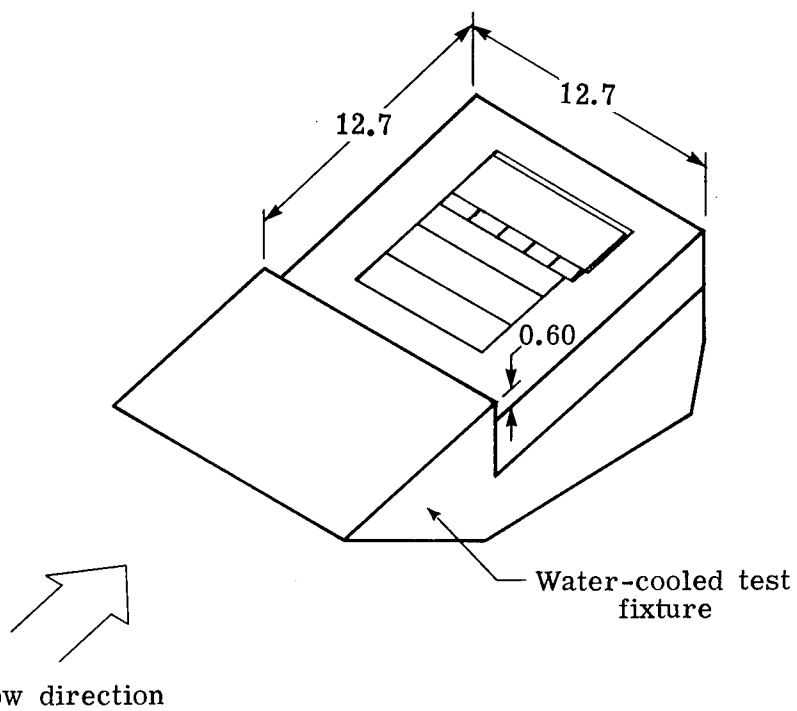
Arc-tunnel test specimen configuration. Dimensions are in cm.
